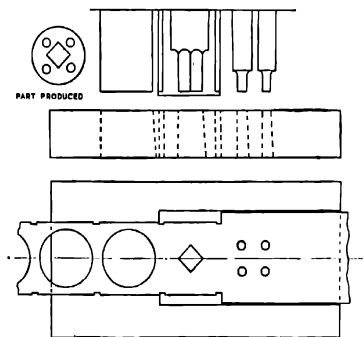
Press tool fitted with trimming punches as a means of locating strip
